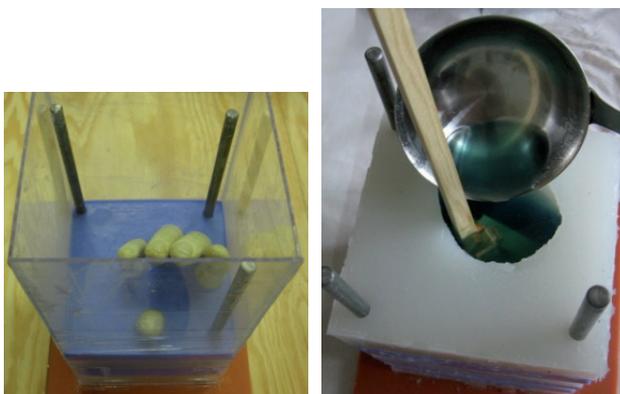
Fabrication process of reusable seven layer mold (left) and casting process of agar based material to this mold (right).
